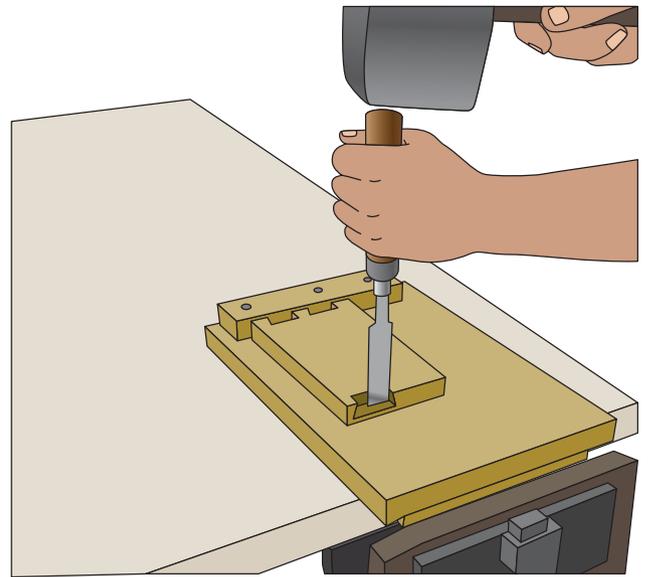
Cutting back edge of sockets with a bevelled-edge chisel
